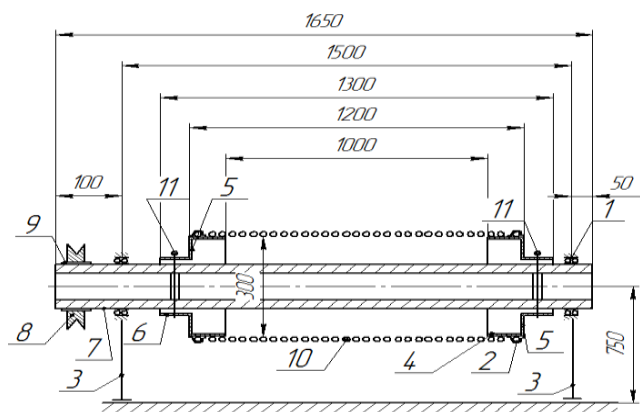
The general arrangement of the helical screw where 1-bearing; 2 – bracket for pressing the wire to the cup; 3 – support; 4 - cup; 5-disk; 6 - bushing; 7-pipe (shaft); 8 – pulley; 9-fixing the pulley; 10-spring; 11-cotter pin.
